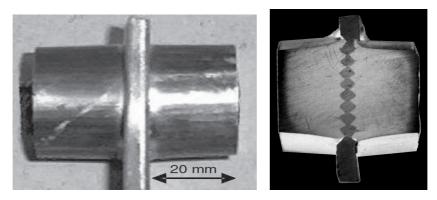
Cold welding samples with Al intermediate layer
